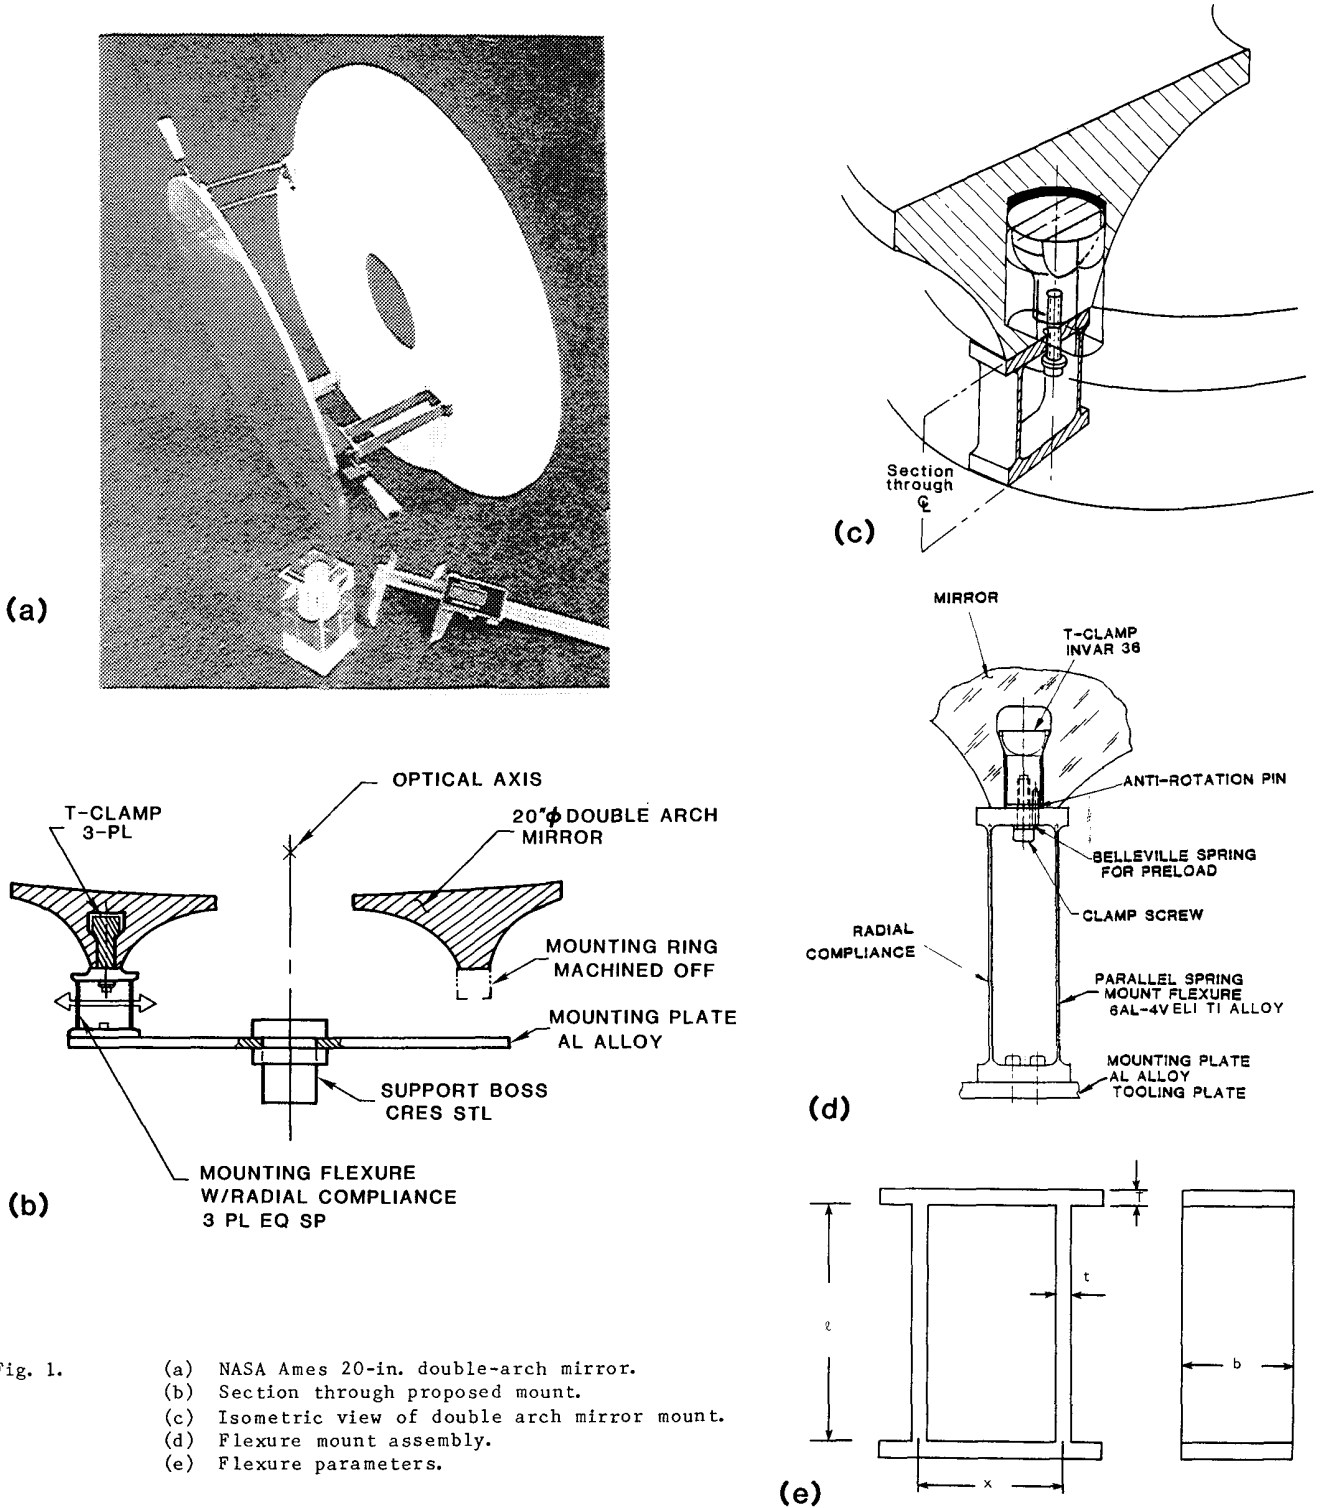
(a) NASA Ames 20-in. double-arch mirror. (b) Section through proposed mount. (c) Isometric view of double arch mirror mount. (d) Flexure mount assembly. (e) Flexure parameters.
